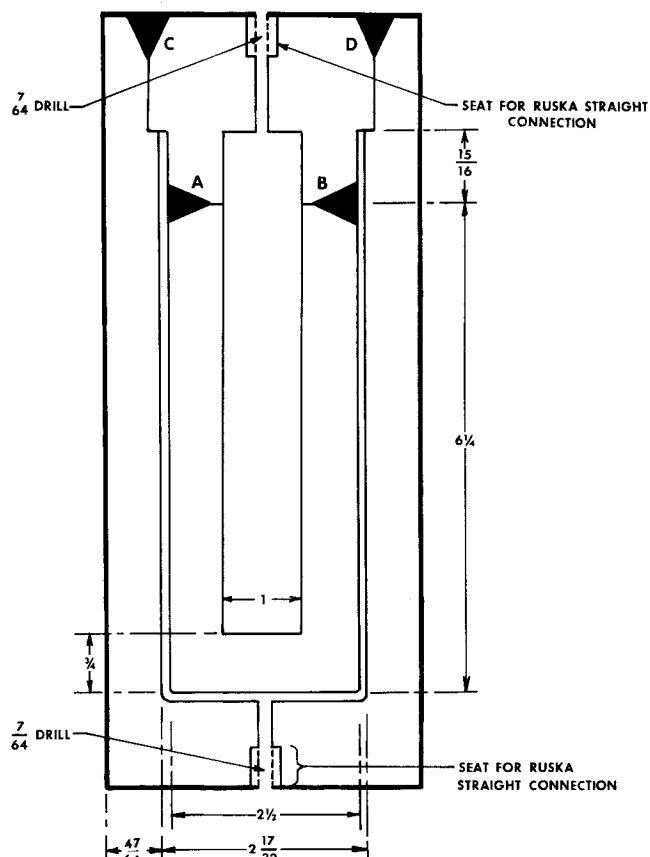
Jacketed bomb assembly (circular cross section). Material: type 303 stainless steel. All dimensions are in inches.
